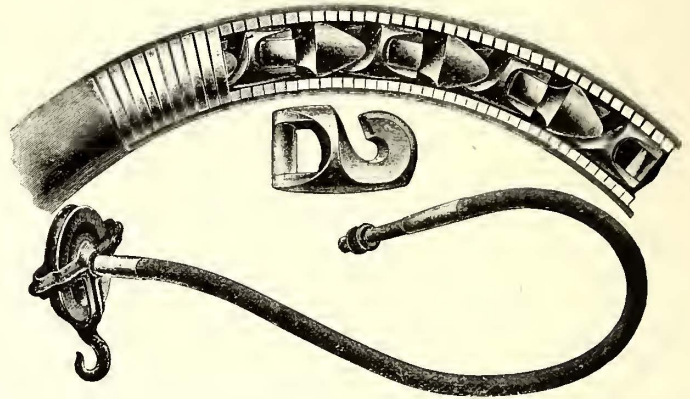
CLEANER FOR CURVED BOILER TUBES
